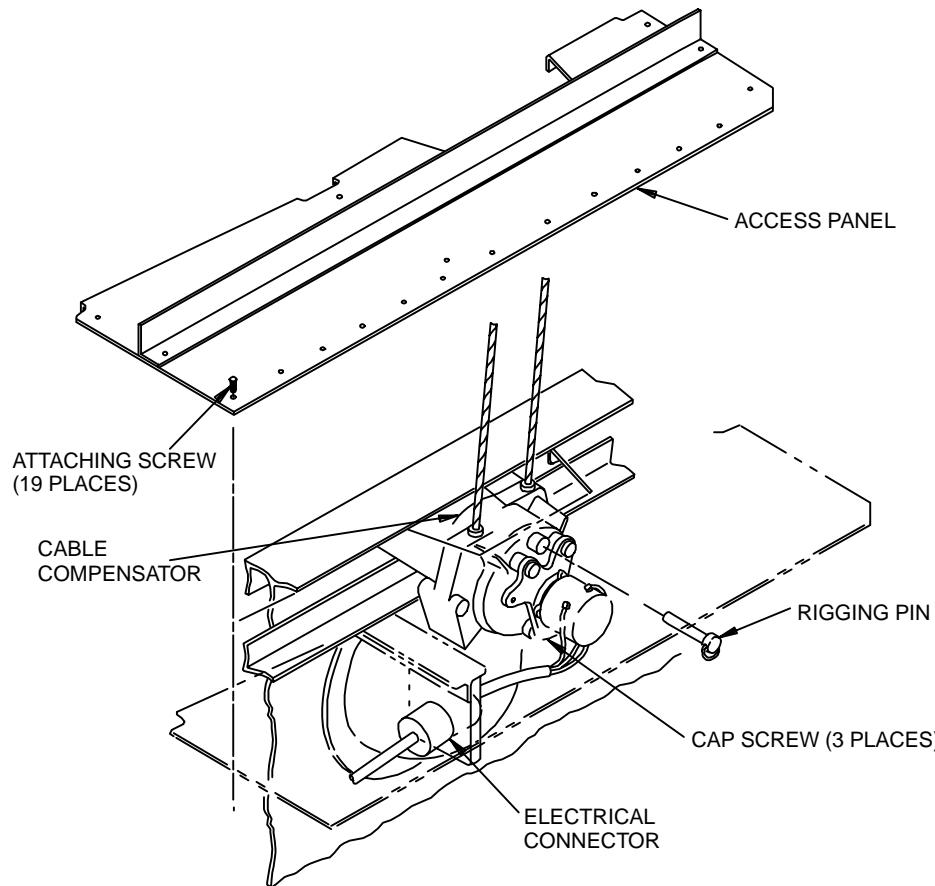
NOSE GEAR STEERING CABLE COMPENSATOR
